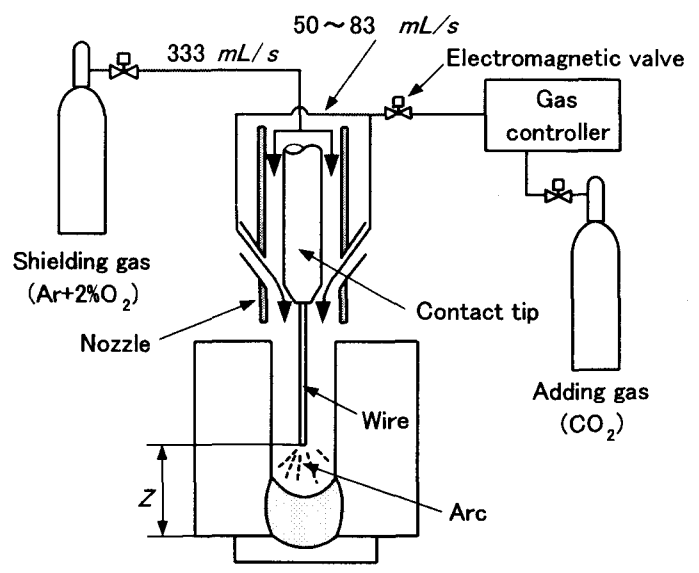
2 Principle of shielding gas composition control system in GMA welding.
